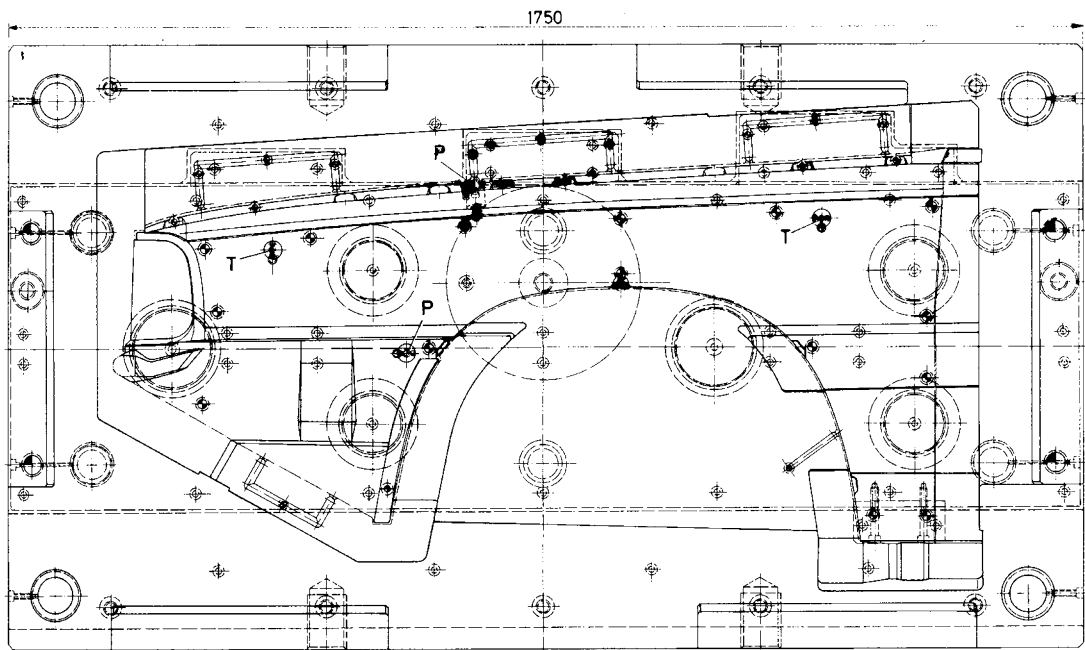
Section through the opened hot runner injection mold for a car front fender (clamping side)
